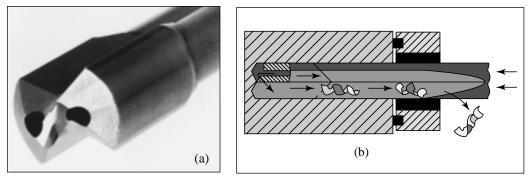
(a) Gun drilling head. (b) A drawing of a gun drilling process. (Courtesy Star Cutter Co.)
